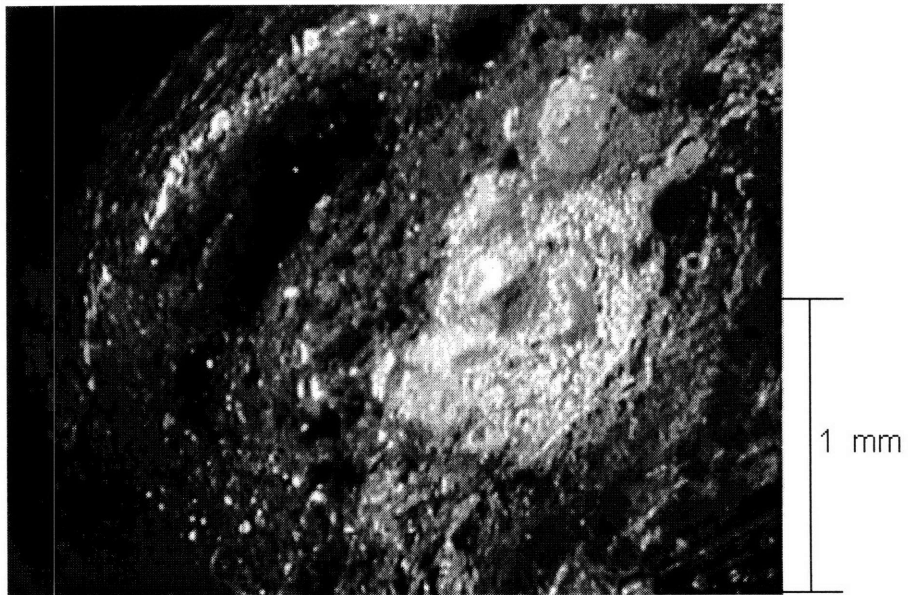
Close view of specimen 2 weld fractured surface
